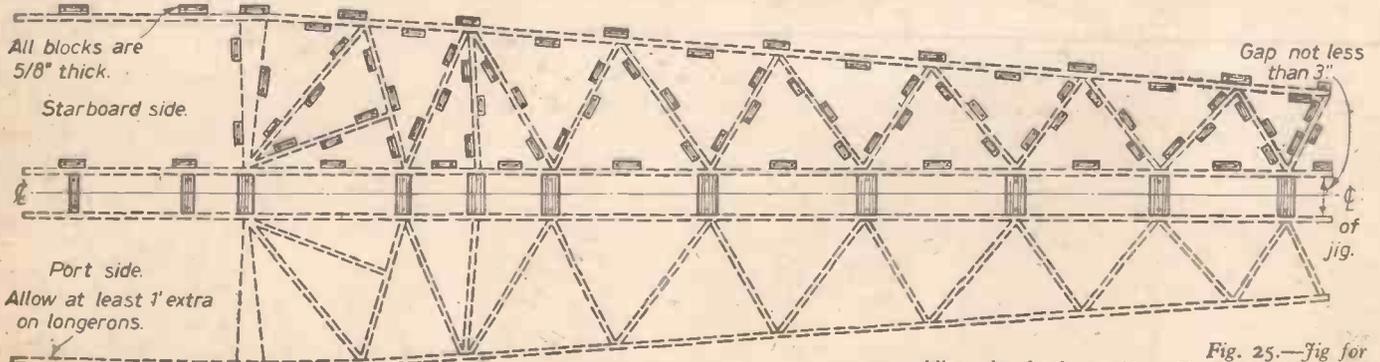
Jig for assembling the fuselage sides. If desired, diagonal bracing members may be located between headless nails. Longerons must be located in blocks.
